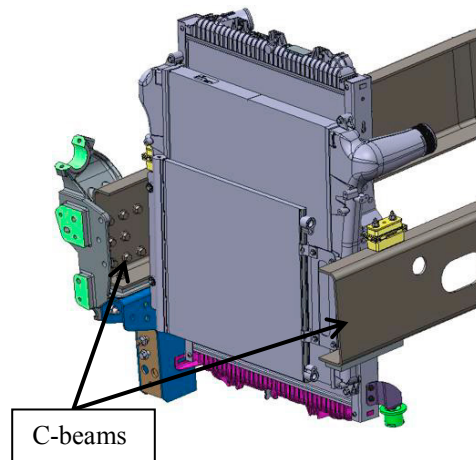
An illustration of the cooling package assembly on the chassis (C-beams, made of steels)
